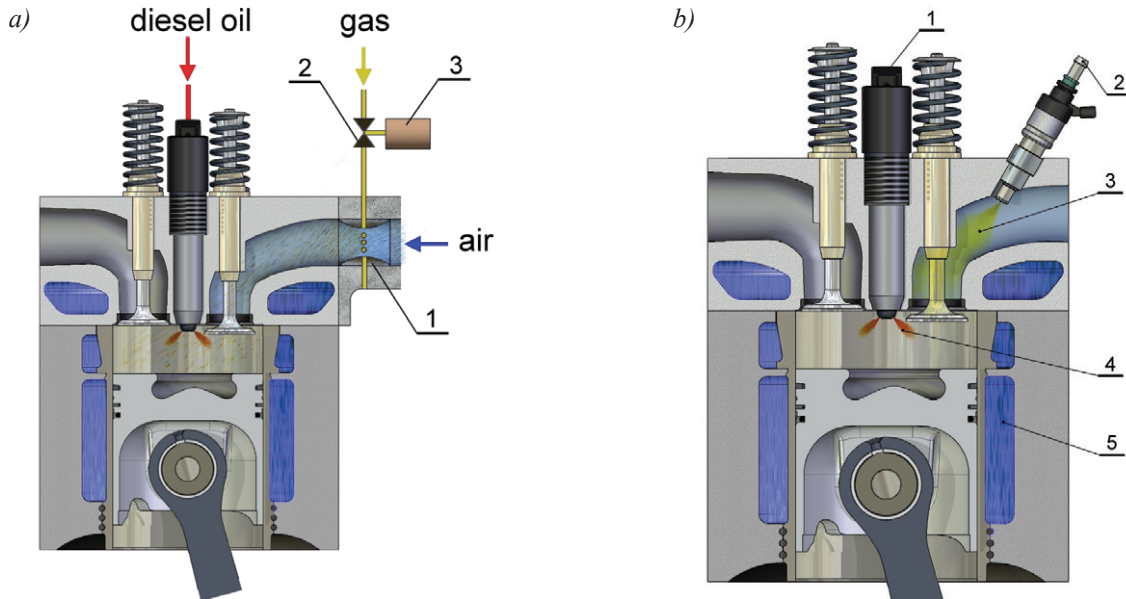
Supply systems of dual fuel engine: a) with mixer: 1 – mixer, 2 – gas valve, 3 – stepper motor, b) injection of the gas to suction manifold: 1 – diesel oil injector, 2 – gas injector, 3 – gas stream, 4 – diesel oil stream
